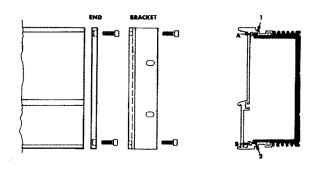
2 PANEL KIT MOUNTING and INSTRUCTIONS
